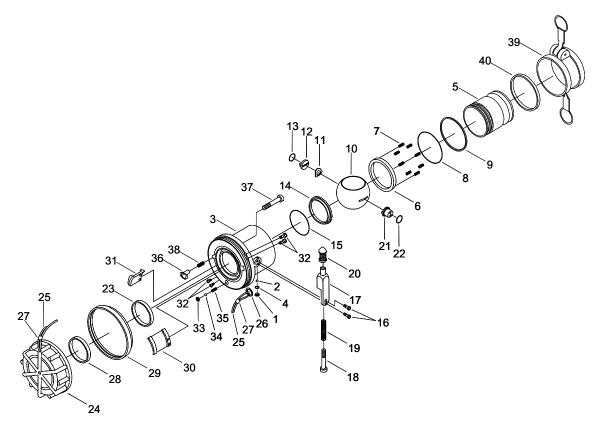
2 In. Male Quick Disconnect x 2 In. Valved Dry-Break Adapter Assembly.
